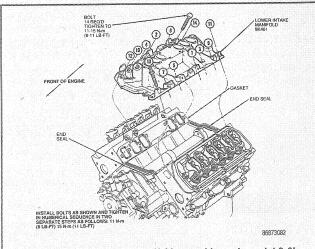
Typical lower intake manifold assembly-early model 3.8L Engine
